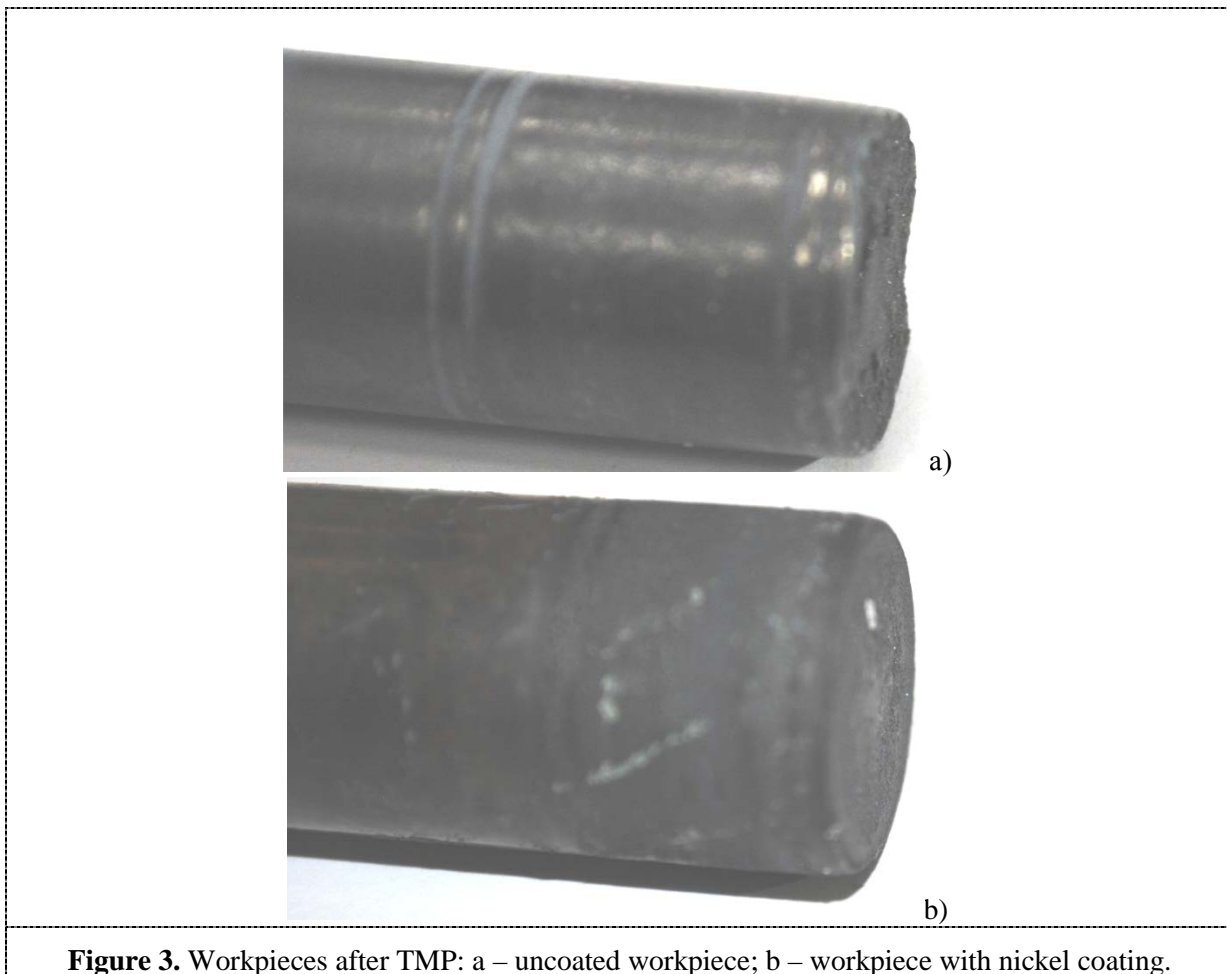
Workpieces after TMP: a – uncoated workpiece; b – workpiece with nickel coating.
